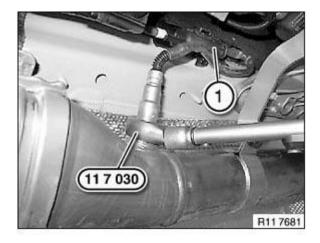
Removing Oxygen Monitor Sensor With Special Tool (11 7 030) Courtesy of BMW OF NORTH AMERICA, INC.
